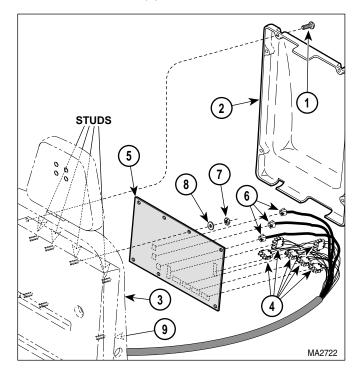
PC Control Board / Program PC Board Removal / Installation
